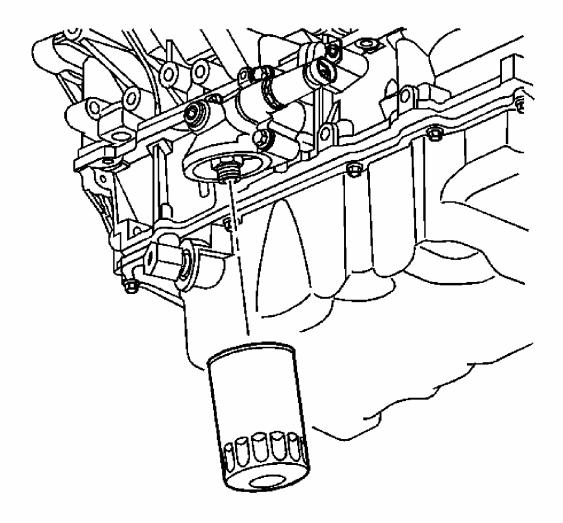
View Of Oil Filter (without Oil Cooler) Courtesy of GENERAL MOTORS CORP.
